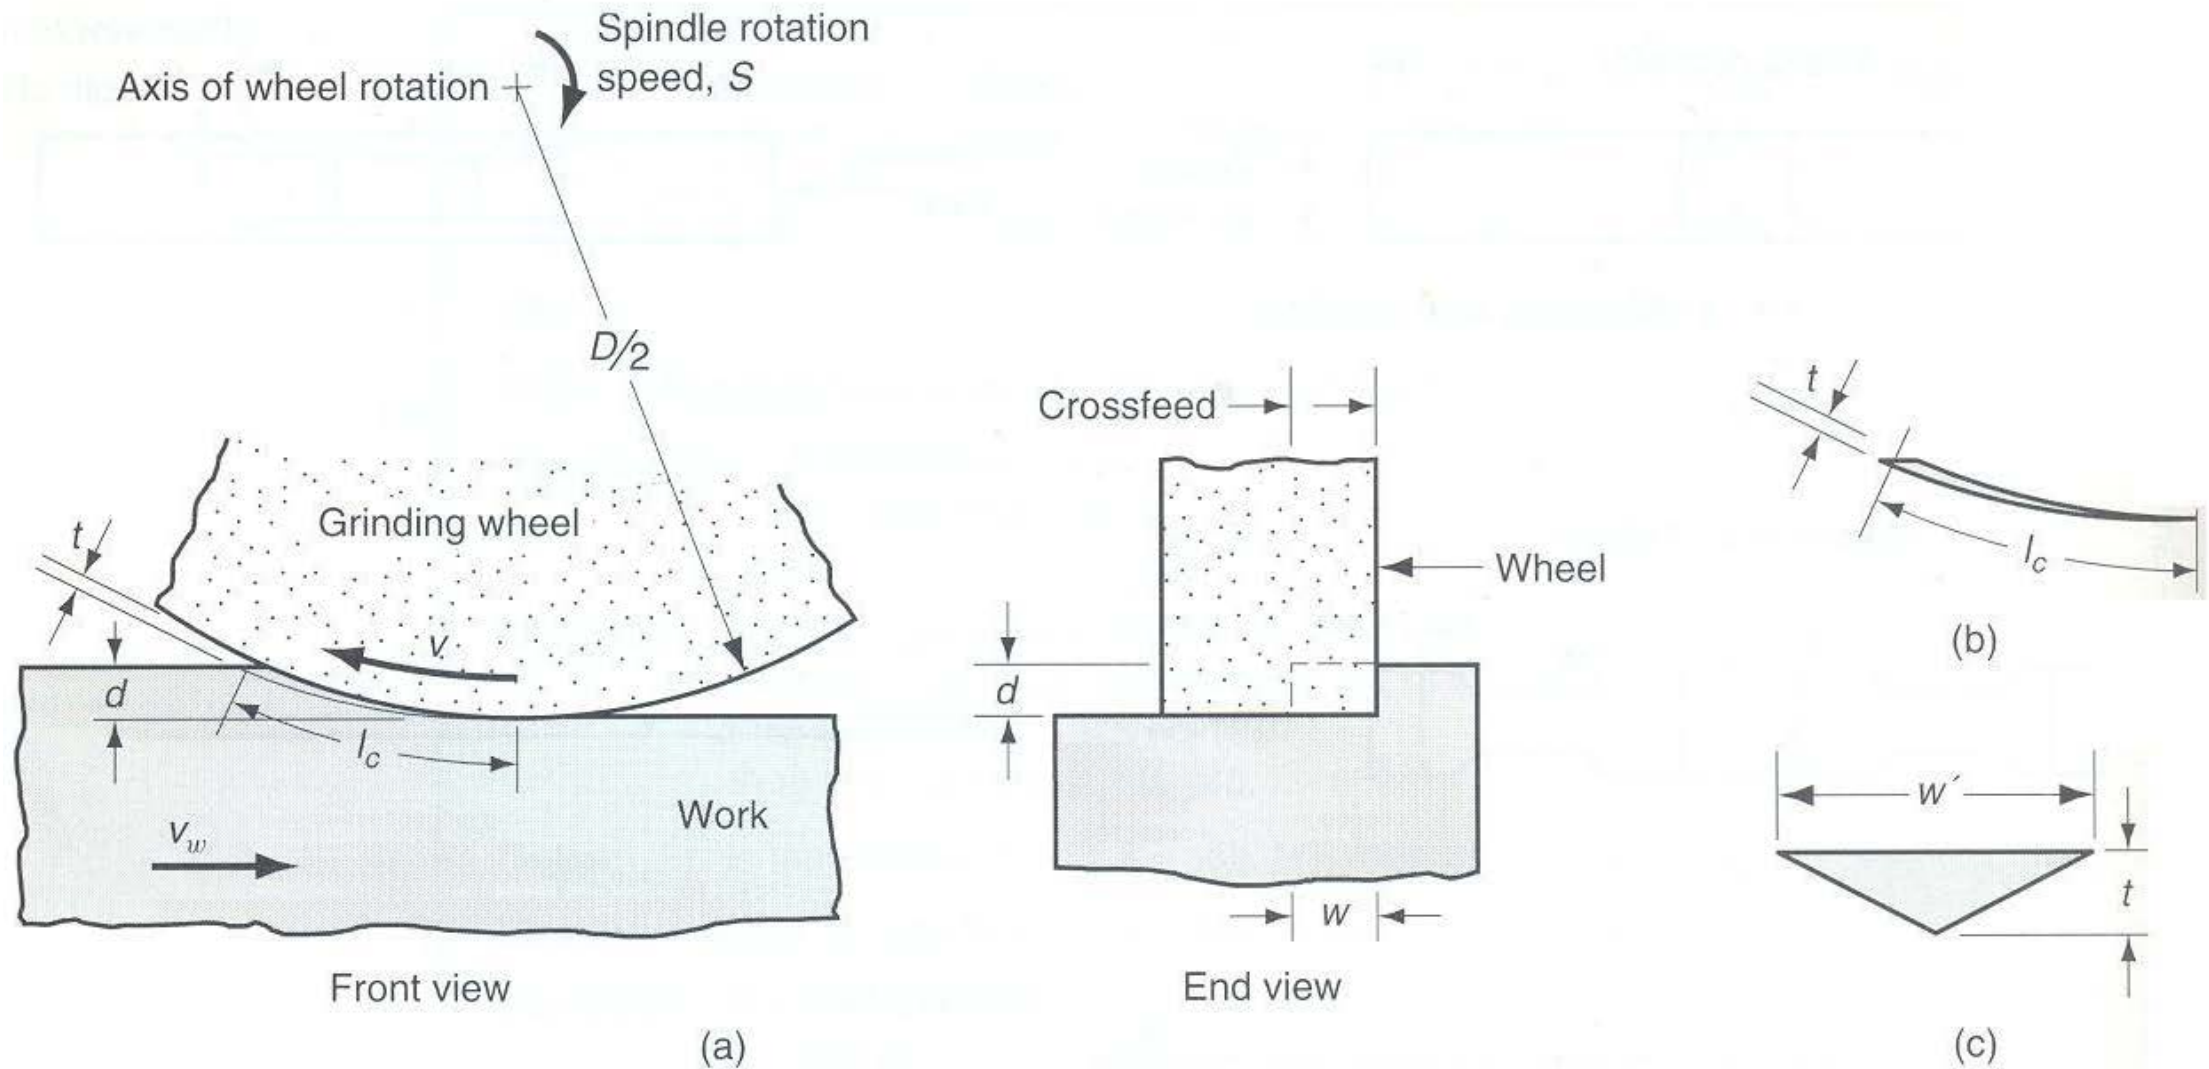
(a) The geometry of surface grinding, showing cutting conditions; (b) assumed longitudinal shape and (c) cross-section of a single chip.
